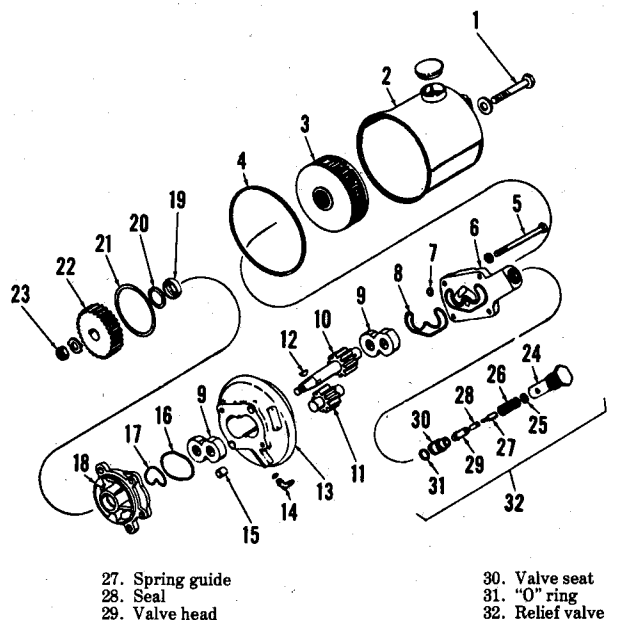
Exploded view of power steering pump with integral reservoir used on late 8600 and 9600 models.
